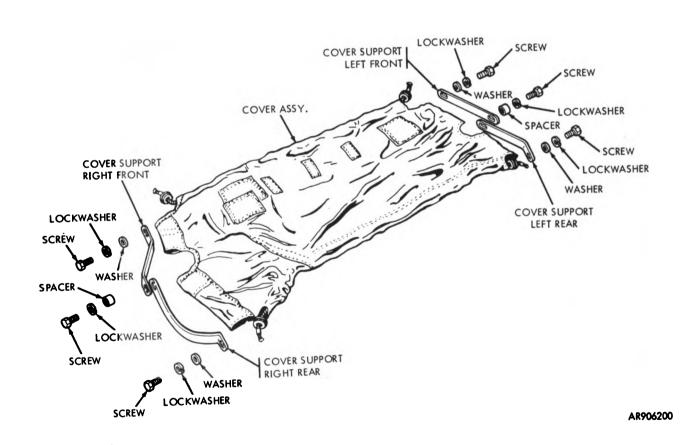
M1 cupola cradie cover disassembly or assembly (vehicles serial numbered A1001 thru A1999 and A3375 thru A3999).
